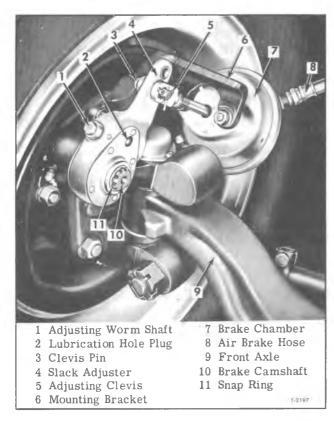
Brake Chamber and Slack Adjuster Installed (Front)
